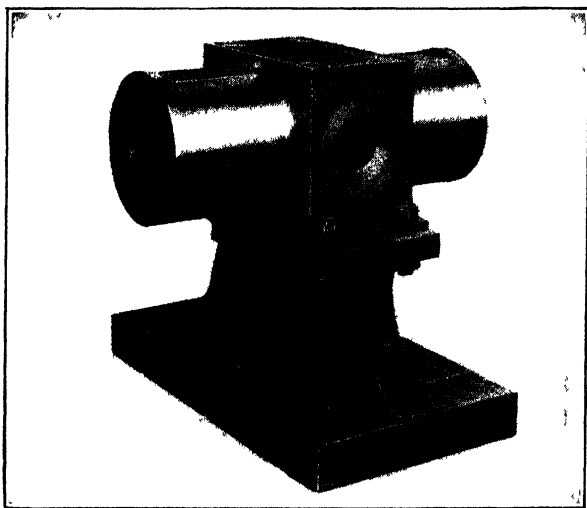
Crosshead Slipper of McIntosh and Seymour
